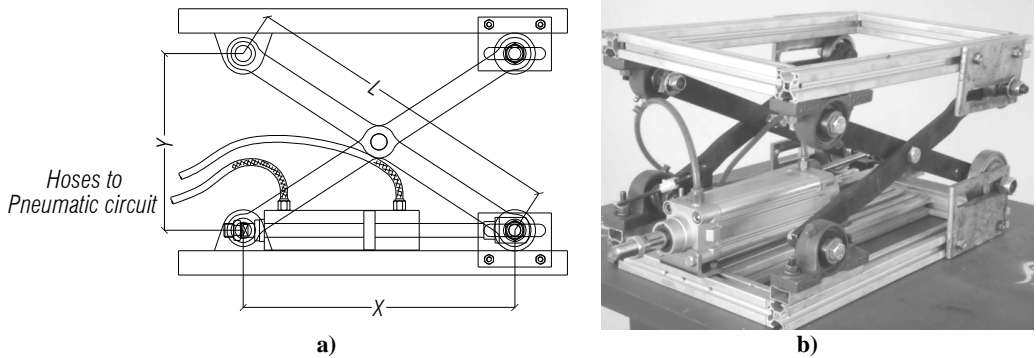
(a) schematics of scissor mechanism with dimensional designations (b) fabricated prototype
